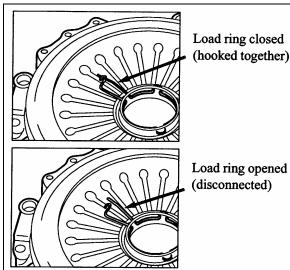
RELEASE BEARING RETAINING CLIP 071
